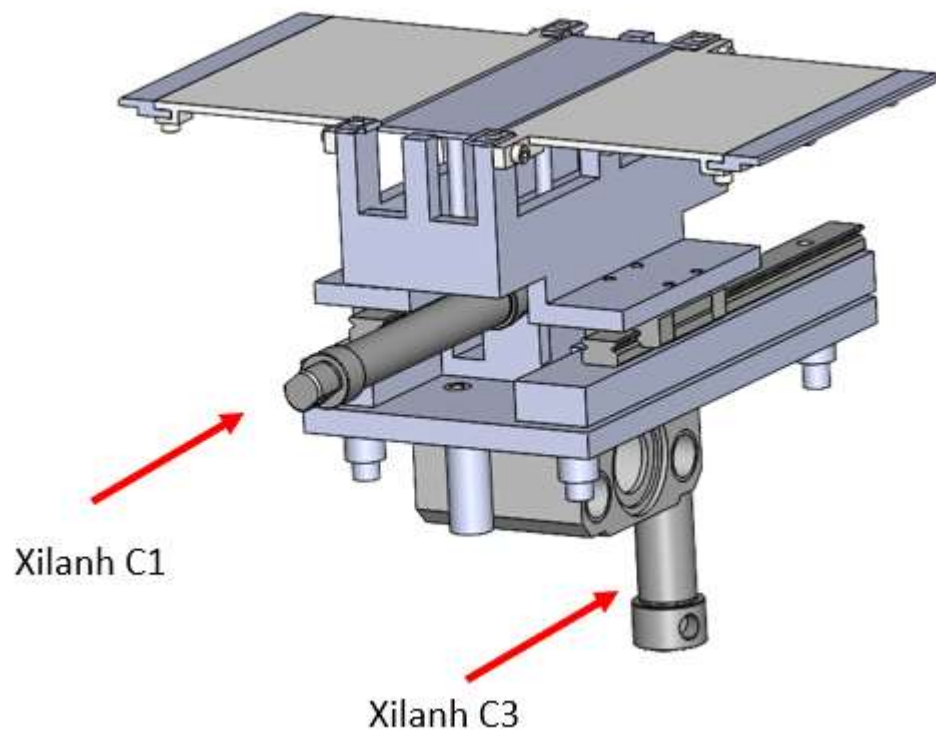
Position of C1 tape-pressing cylinder and C3 label suction cylinder
